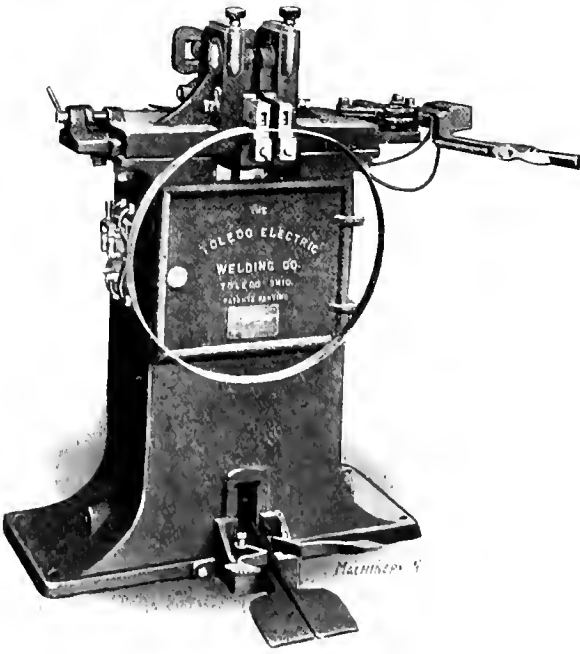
Universal Welding Machine for Steel up to 3/4-inch Diameter
